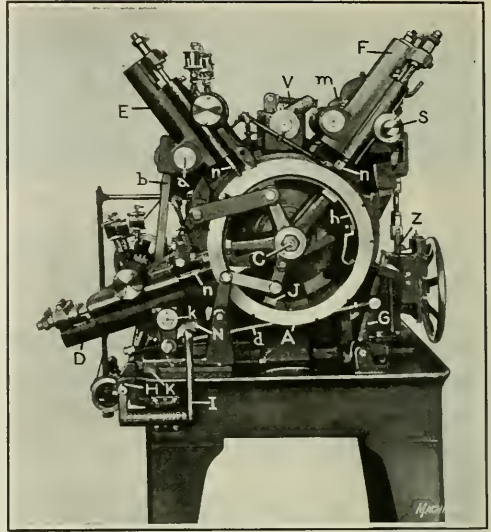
Front View of Machine used for drilling and tapping Wire Wheel Spoke Nipples
